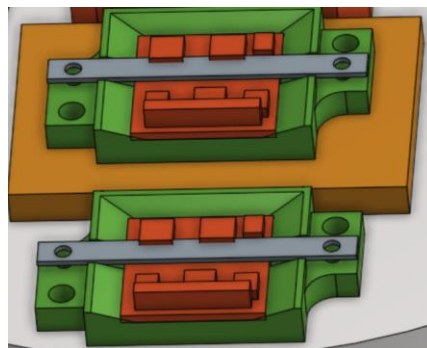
A comparison between mounting passive accelerometers. The bottom setup contains no damper and behaved as the control accelerometer
